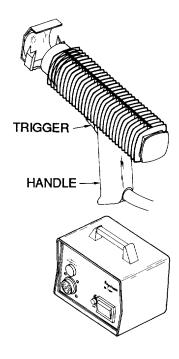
Infrared Heating Tool, IR-1759 with Standard Electronic Control ED-7-004
